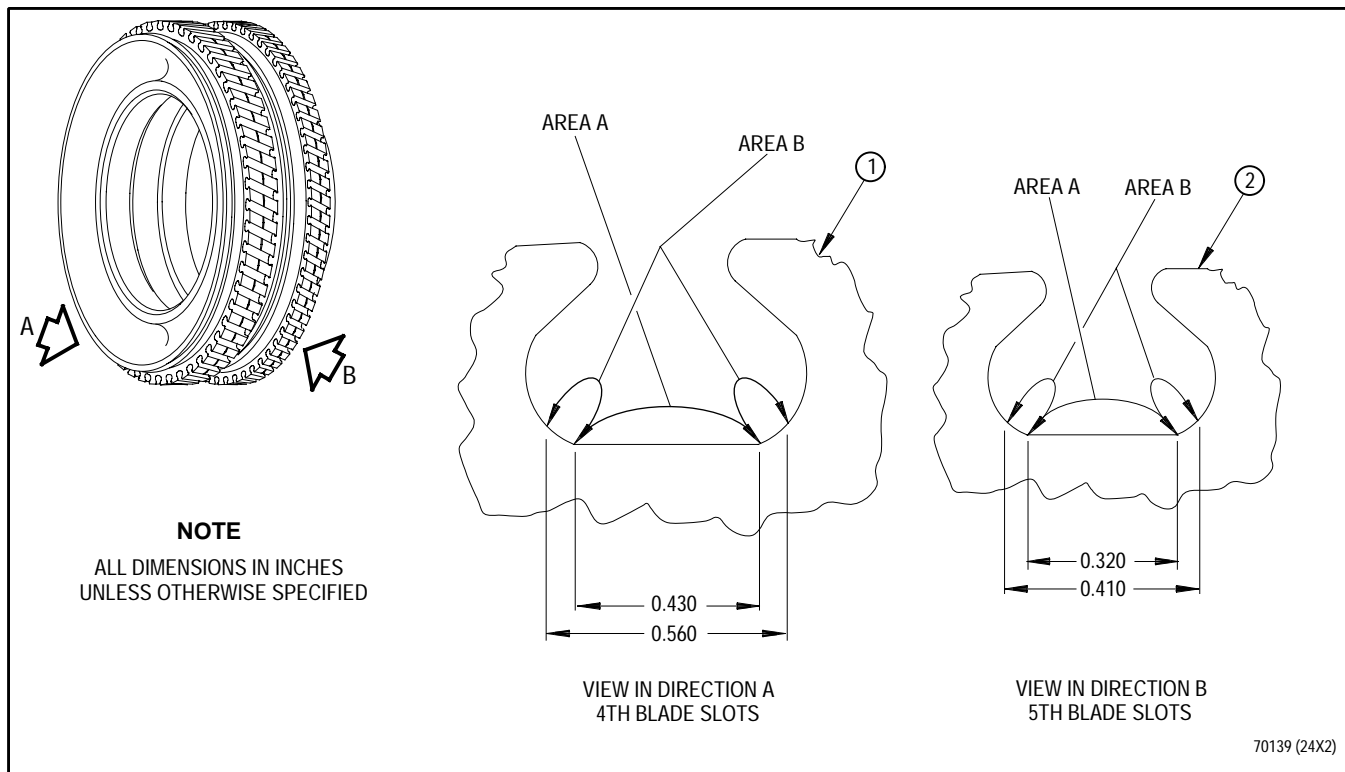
B. Fourth and Fifth Stage Rear Compressor Front Disk-Drum Rotor Assembly - Eddy Current Inspection
